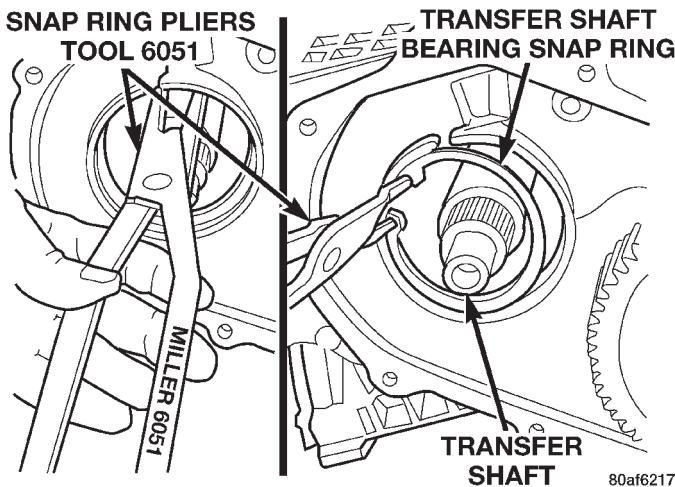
Install Transfer Shaft Bearing Snap Ring
